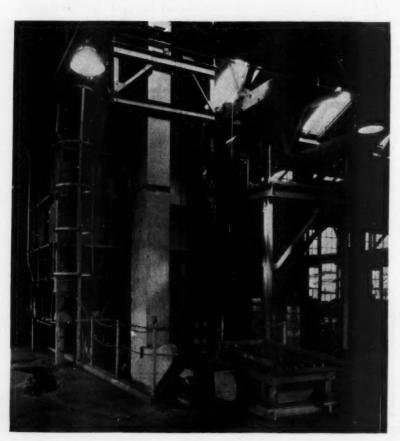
Sand handling arrangement includes vibrating shake-out, elevator, storage bin, measuring hopper, bucket loader, mixer, with dust hood, distributing platform and molder's hopper.
